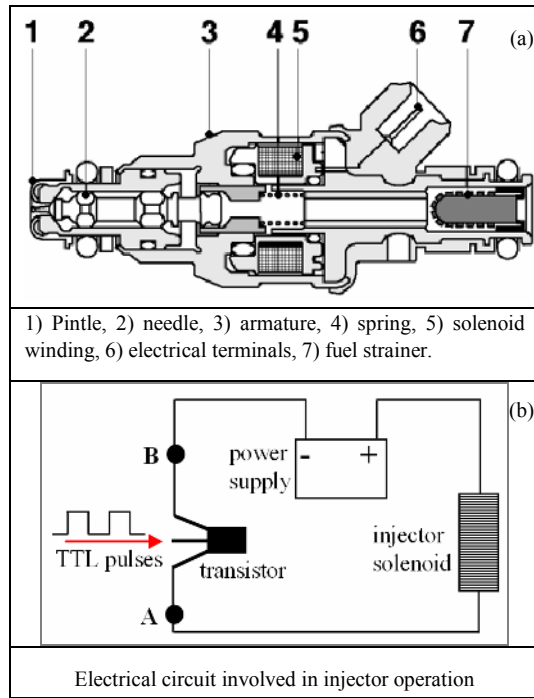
Cutaway of fuel injector used in test (a); and scheme of injection electrical circuit (b).
